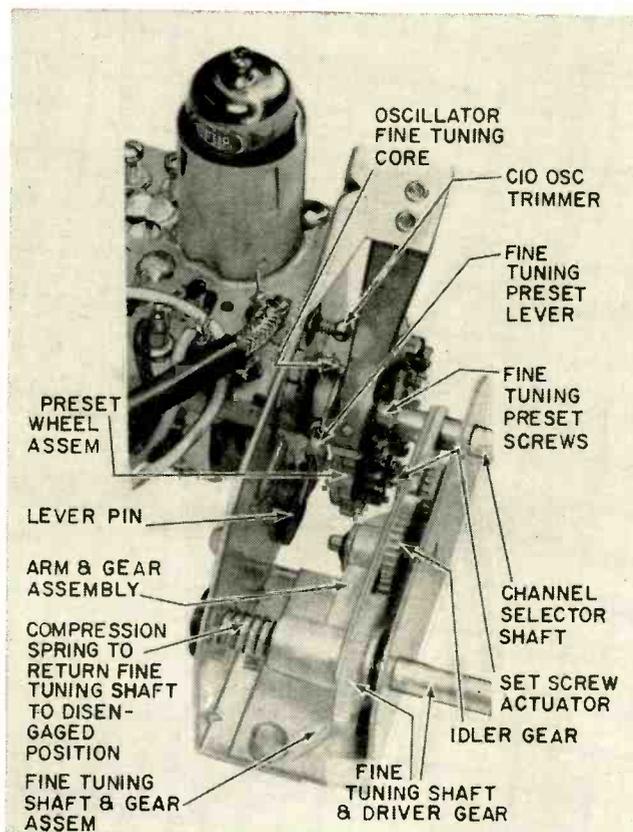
Motorola fine tuning system. C10, for overall oscillator adjustment, is accessible when channel-selector knob is removed.
